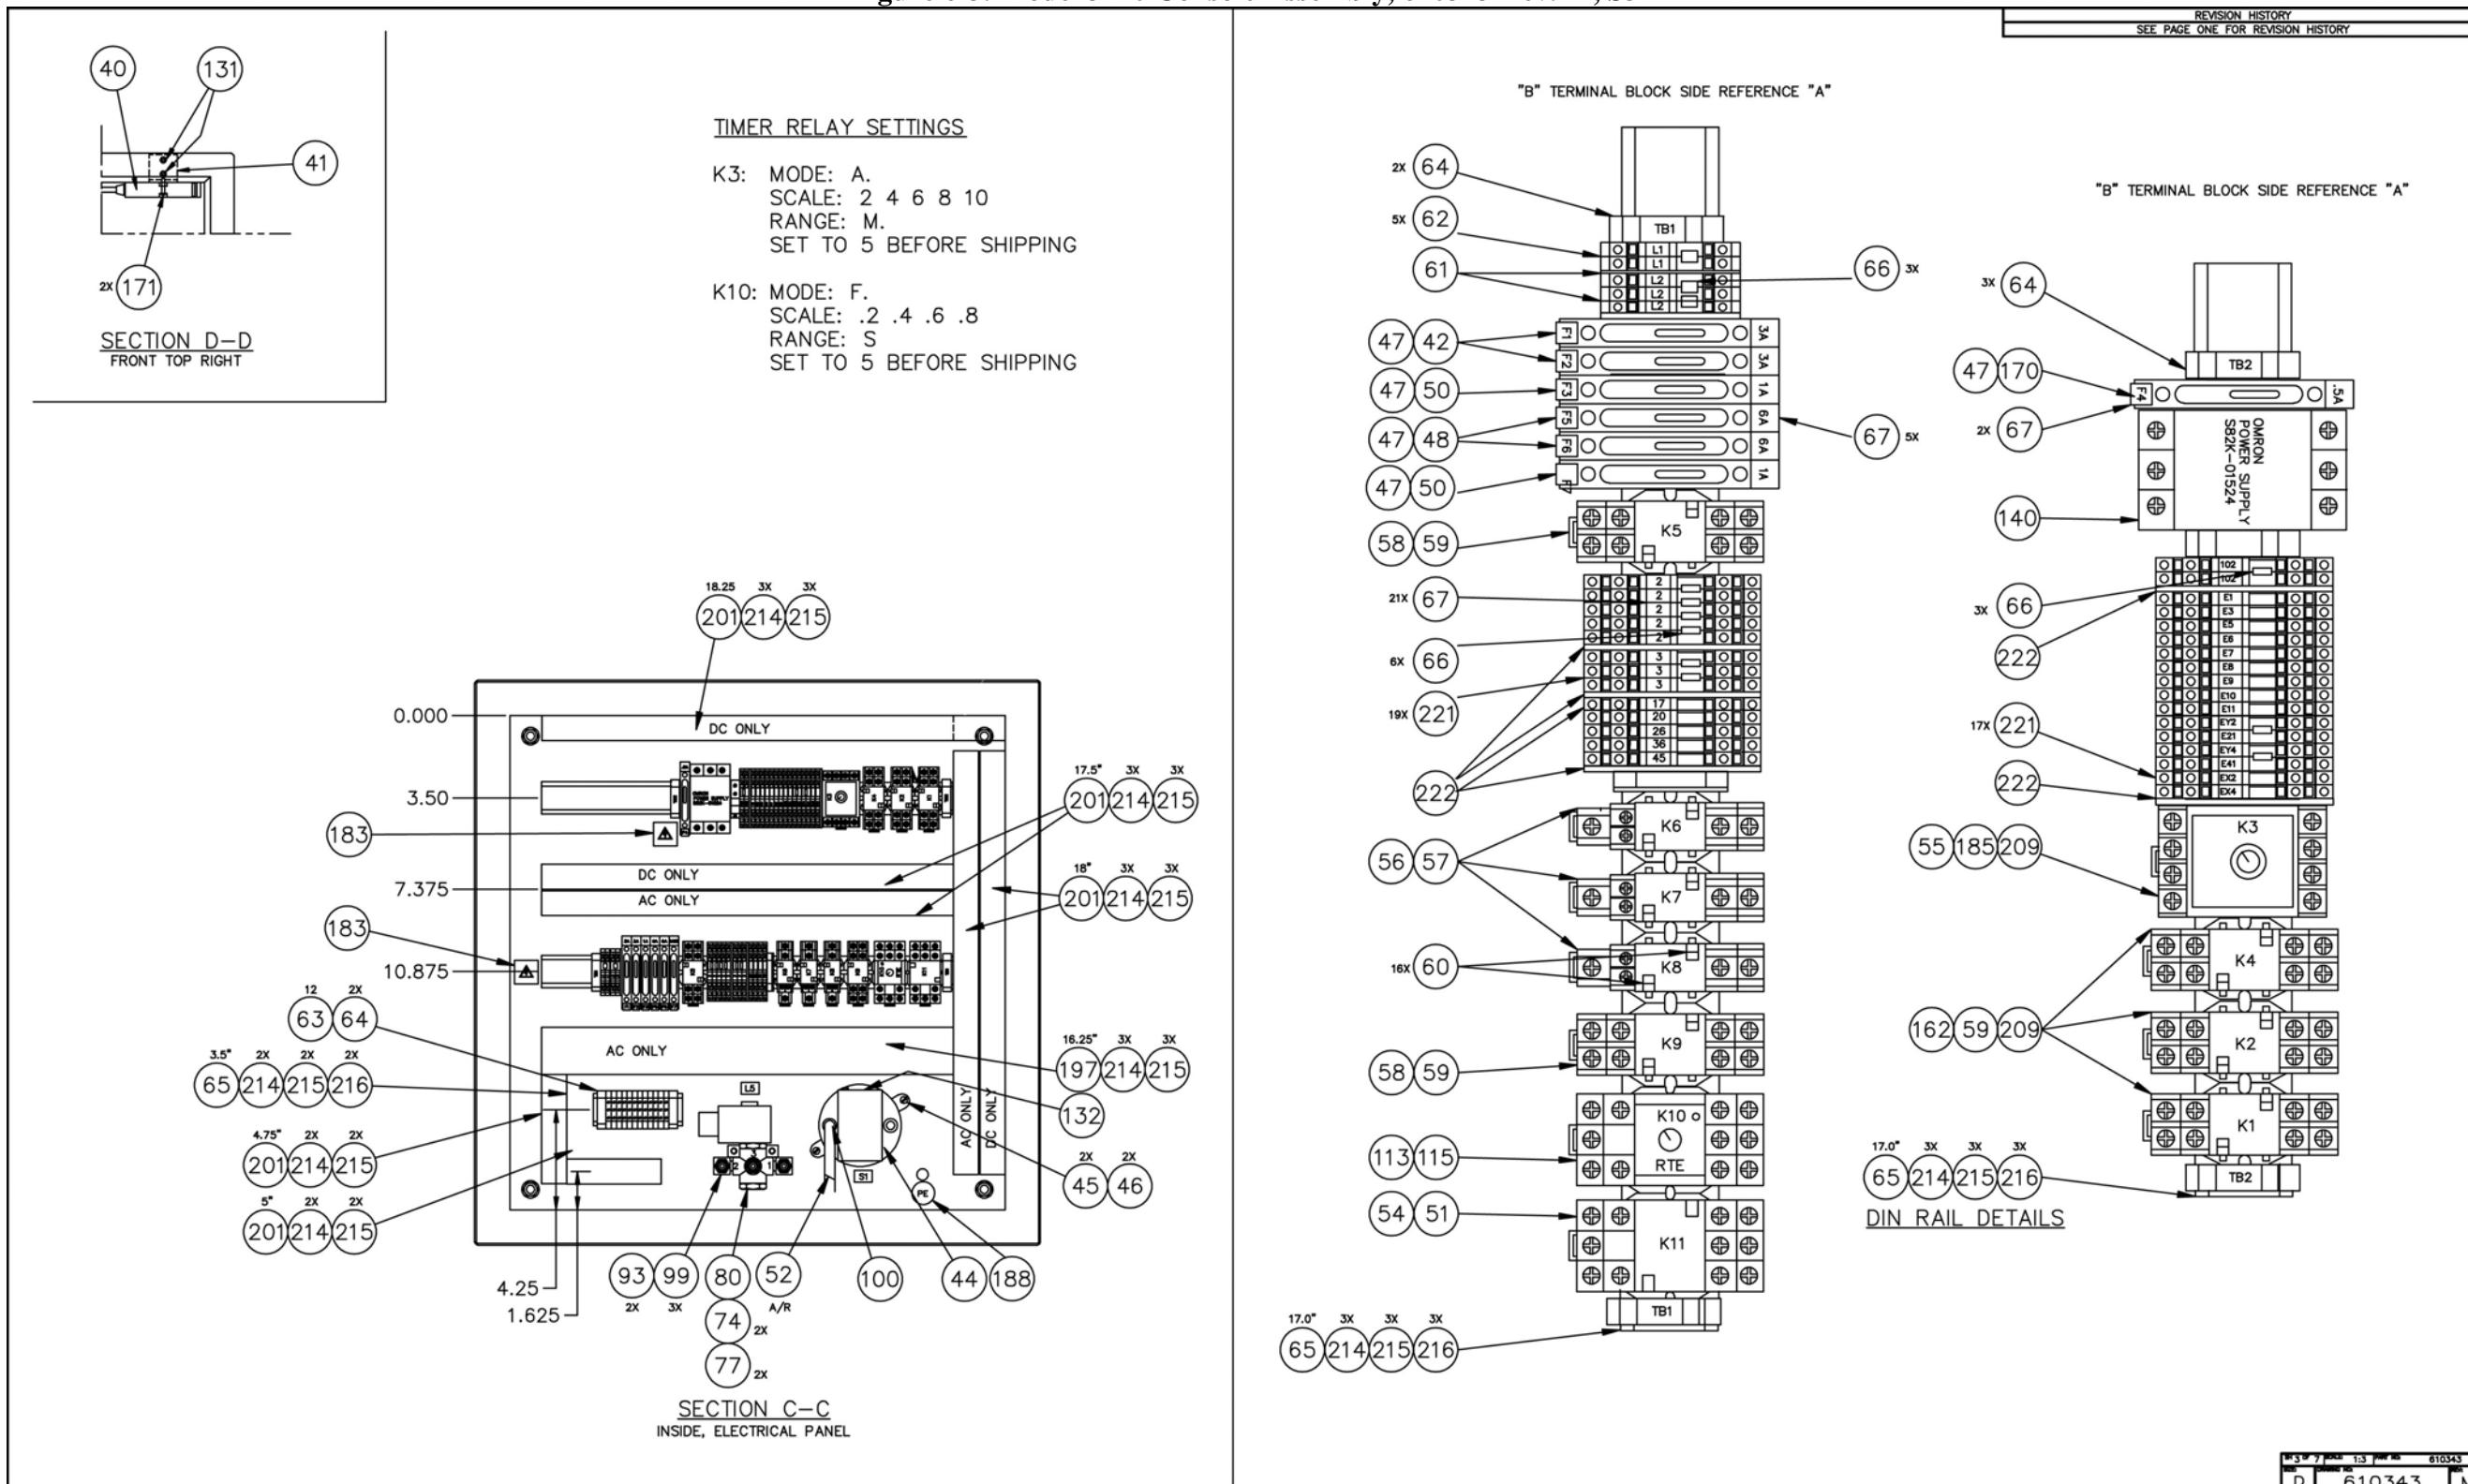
Model 3710 Console Assembly, 610343 Rev. M, S4
